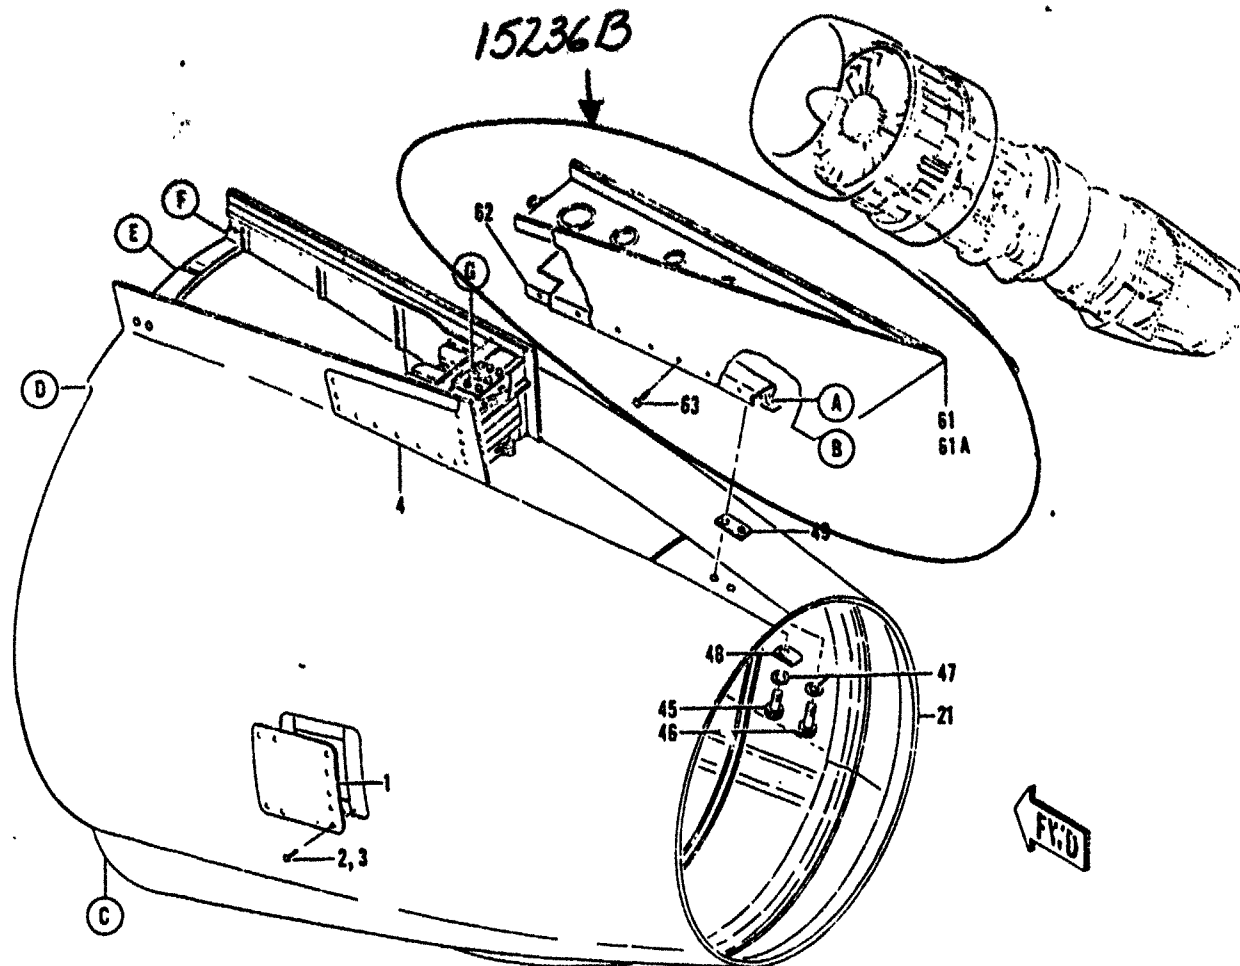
Aft Thrust Reverser and Sleeve Assembly (Sheet 1 of 3)
